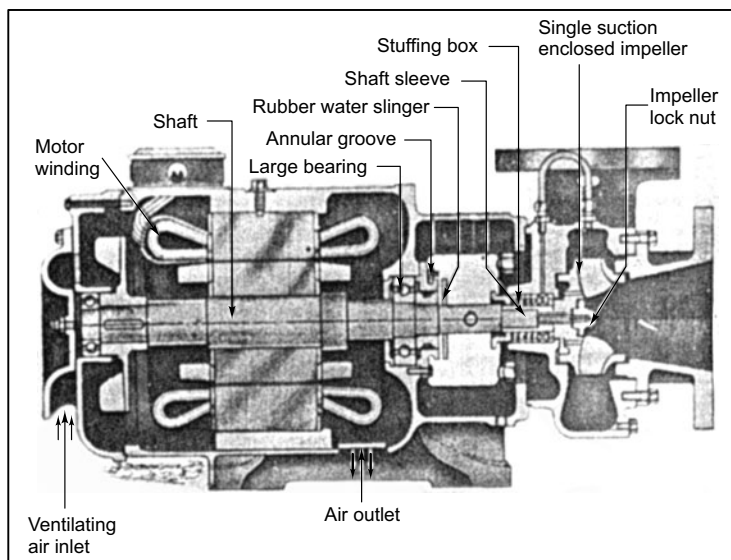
Sectional view of a motor driven monoblock horizontal volute centrifugal pump
